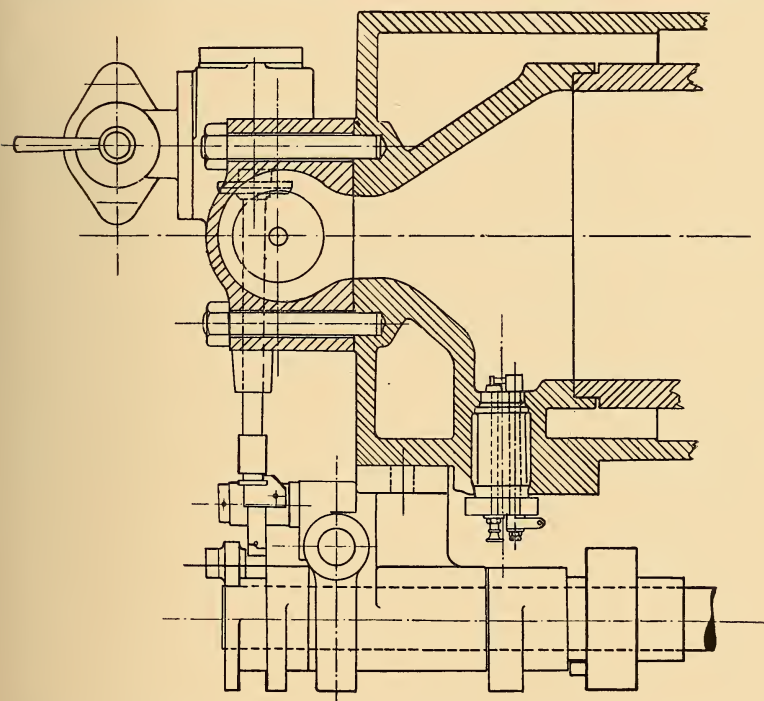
Admission end of Cylinder of National Gas Engine. Note the conical interior and fitting of cylinder liner. Note also the cams on half-time-shaft for operating valves. Four Cycle Engine.
